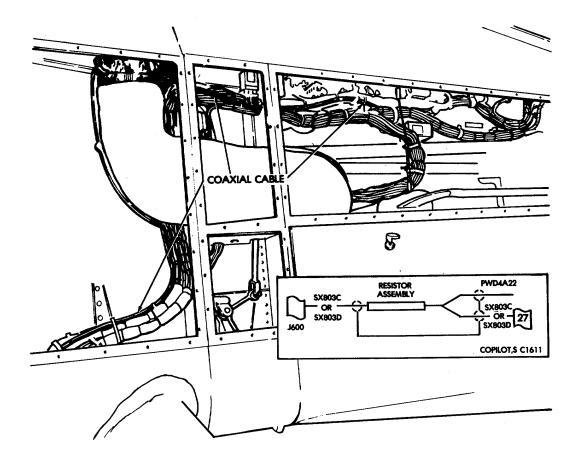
Routing of Coaxial Cable and Installation of Resistor Assembly (Sheet 1 of 3).
